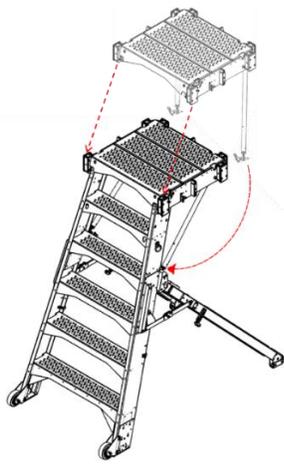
MX5+ with Service Deck, including two guardrails, two tool trays, one laptop tray, one single step and one safety bar.
